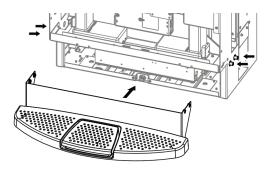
Installing x-ray footswitch assembly (which includes new lower front panel kick plate)
